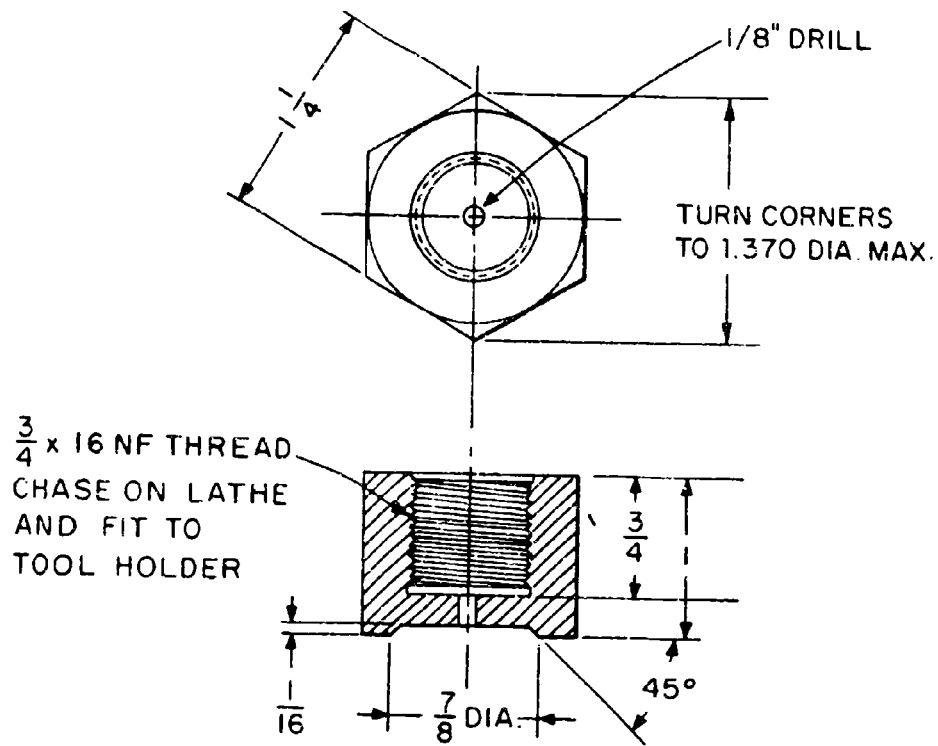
FIG. ELECTRO - CHEMICAL TOOL HOLDER
